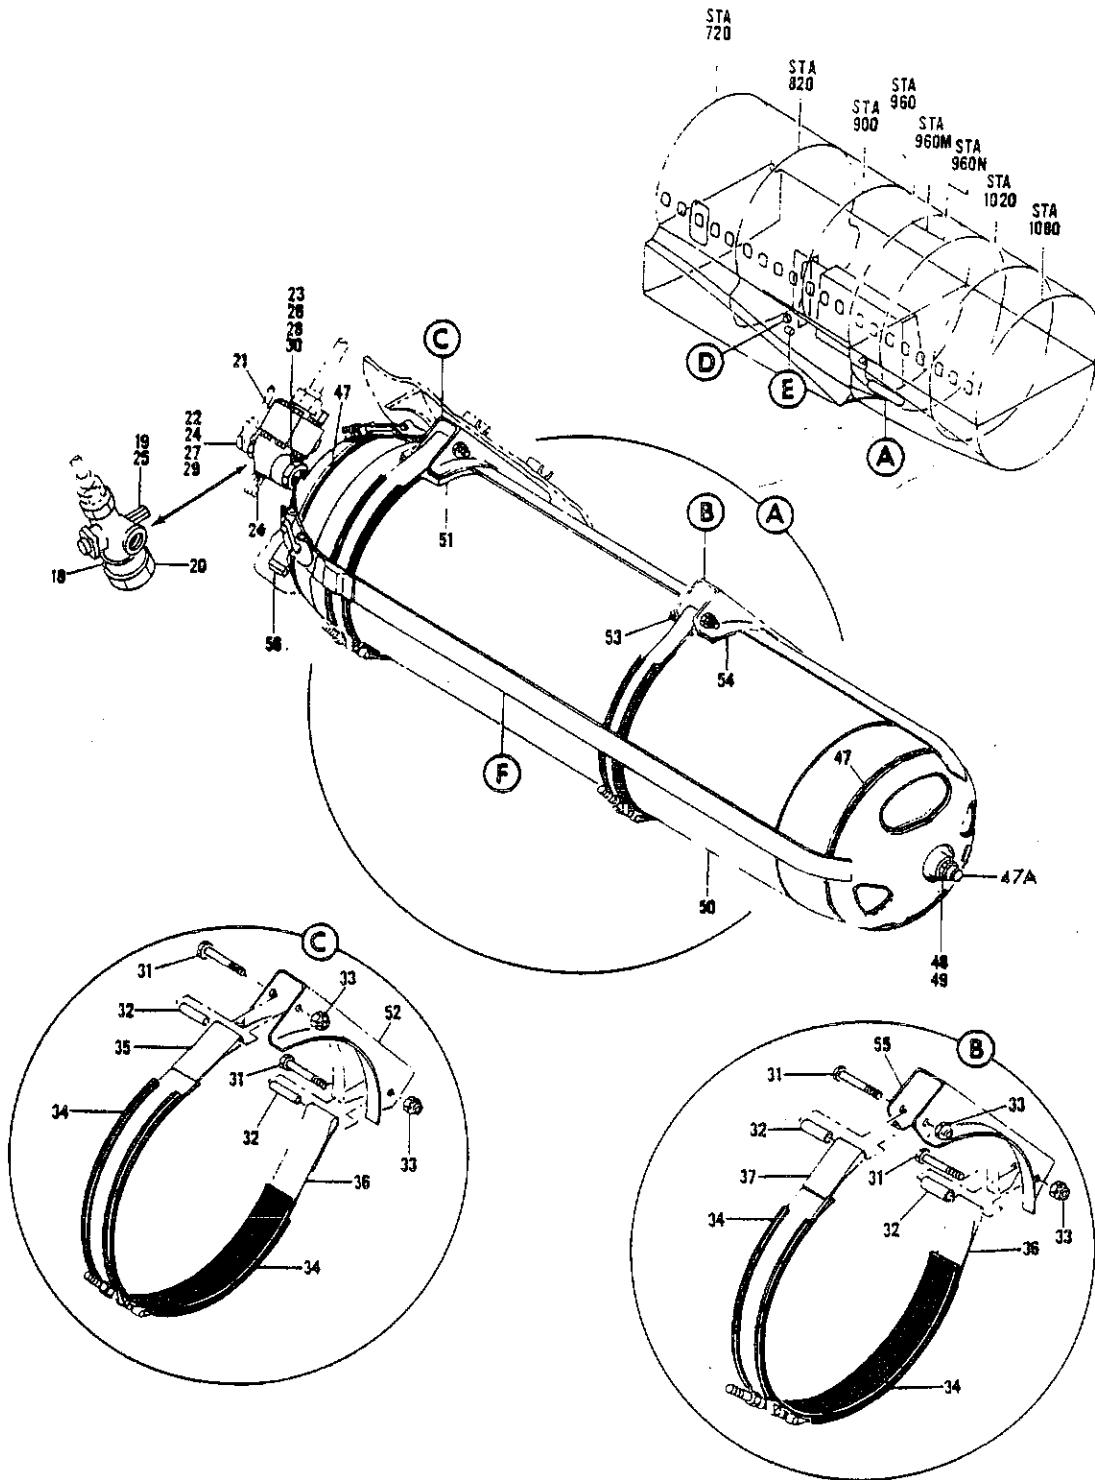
BOTTLE INSTL, ENGINE STARTER AIR (SHEET 1)
